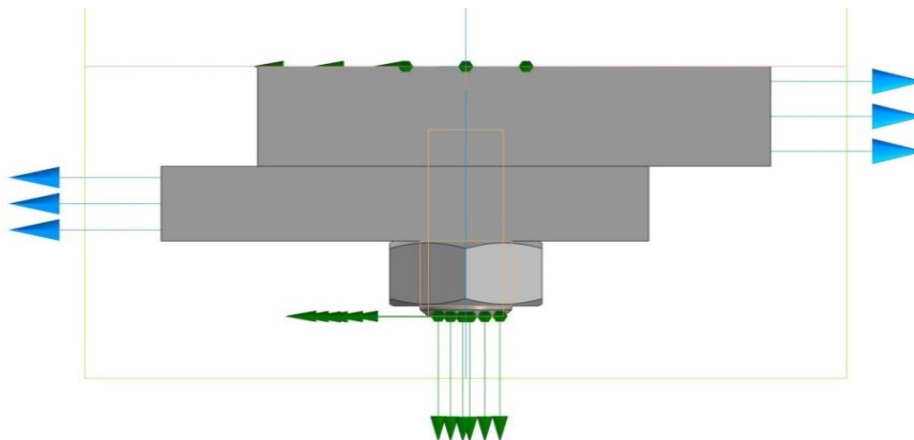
Bolt combination detail and three-dimensional model of its assembly unit
